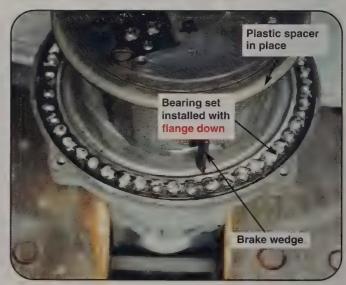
The plastic spacer is in place, the bearing set is installed with the flange down, and the brake wedge is in position (see steps 40, 41, and 42).
